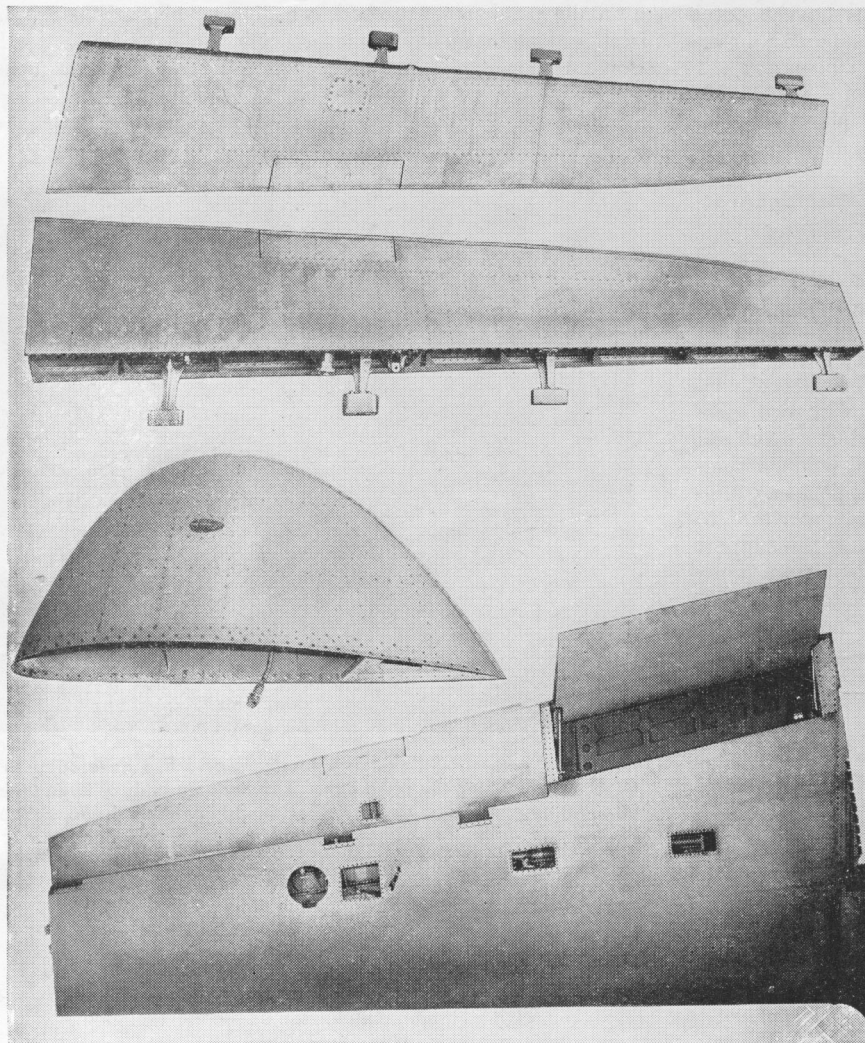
This group shows (top to bottom) upper and lower aileron surfaces; wing tip assembly; and lower surface of outer wing panel with flap extended. Wing tip outer skins are spot-welded to beaded inner skins, reinforced by two beams. The tips attach to an outer panel by flush screws.
